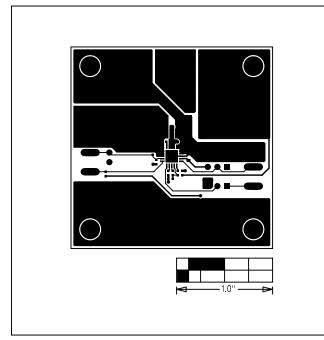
MAX17504 3.3V Output EV Kit Component Side PCB layout
